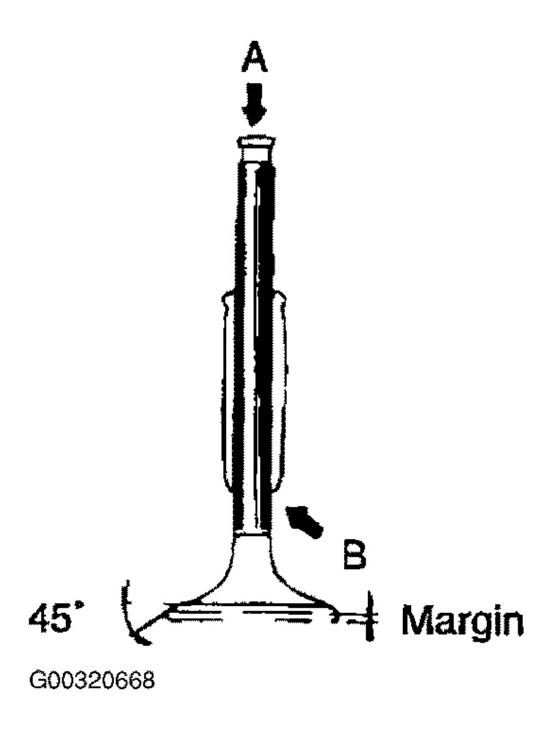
Illustrating Valve Margin Courtesy of KIA MOTORS AMERICA, INC.
